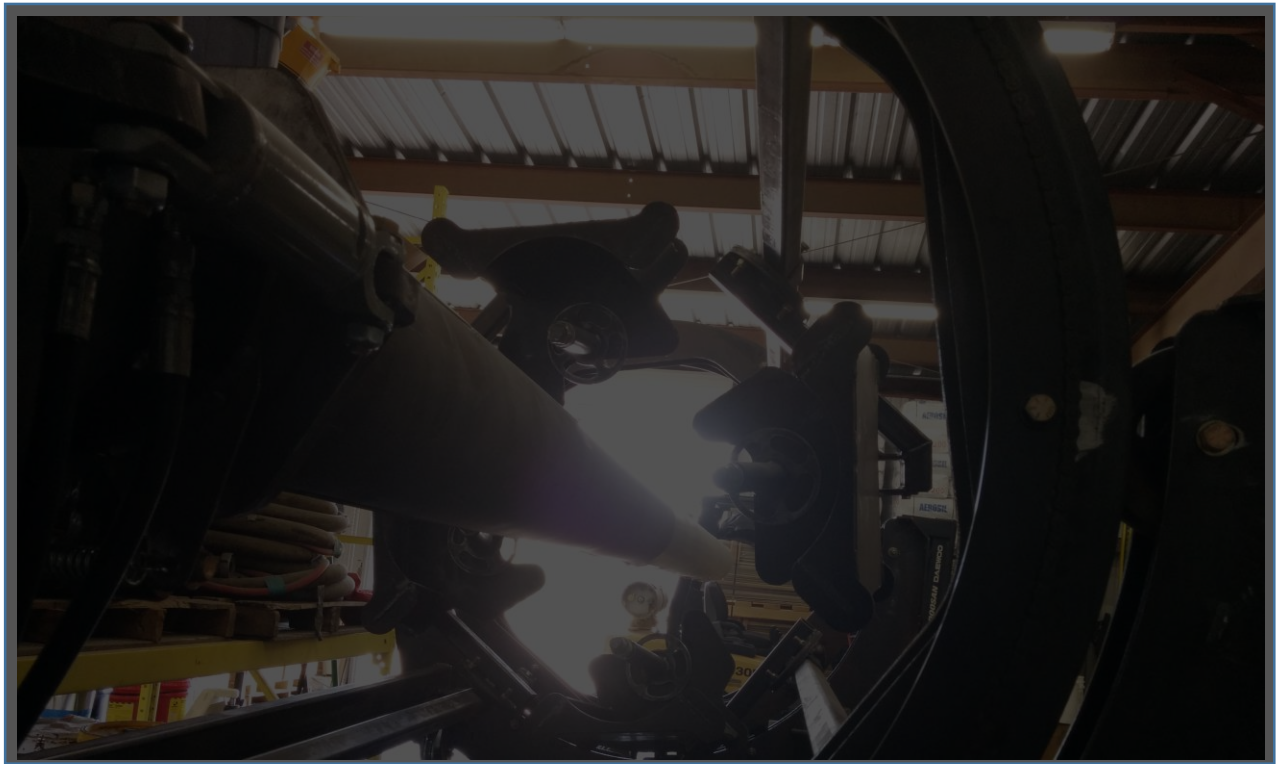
First Prototype of the MMU (Mobile Manufacturing Unit) InfinitPipe®
